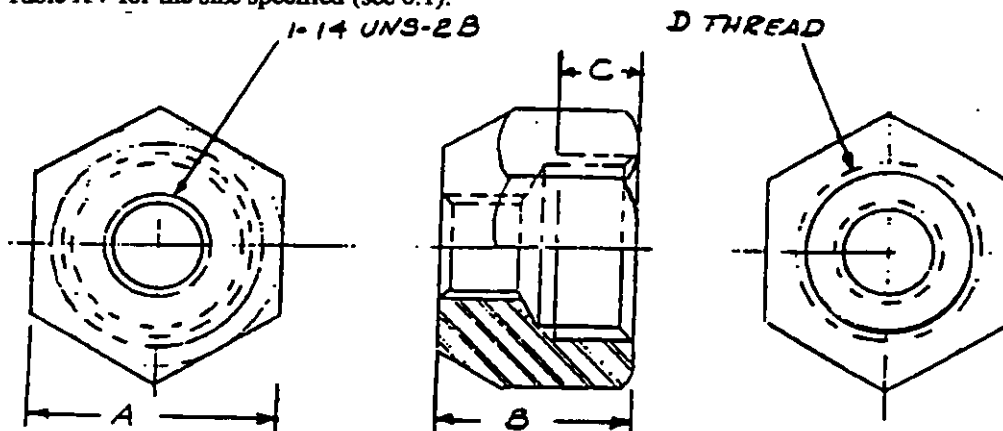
Type XIII, class 2, style B, puller adapter, mechanical, gear and bearing, female thread with 1 - 14 UNS-2B tapped hole.
